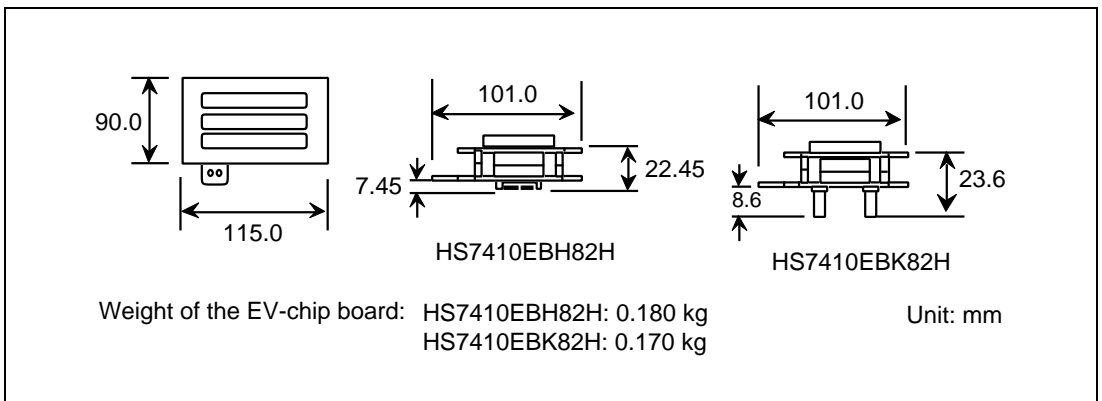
External Dimensions and Weight of the EV-Chip Board
